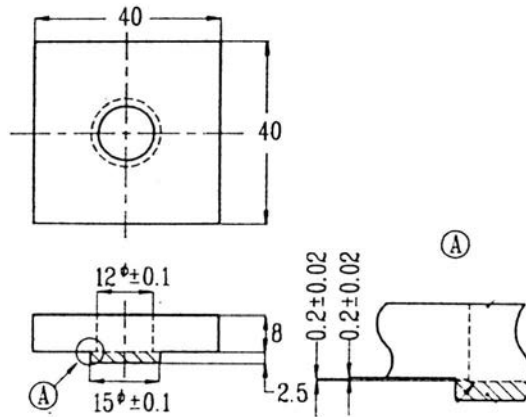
Dimensions of ram tensile test specimen according to ASTM [5].
